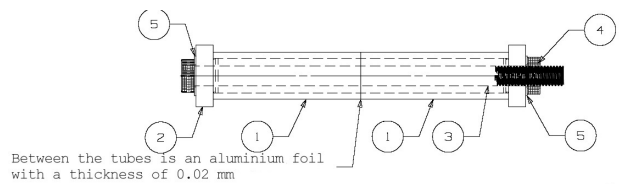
Test specimen 3 with 1: SiC tubes sawed with aluminium foil of 20 µm between them, 2: aluminium ends, 3: 8 mm. Allen screw, 4: 8 mm. nut, 5: ring
